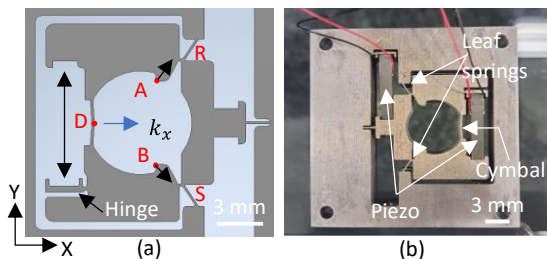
BAM-2 (a) CAD design (b) Image of the fabricated part.
